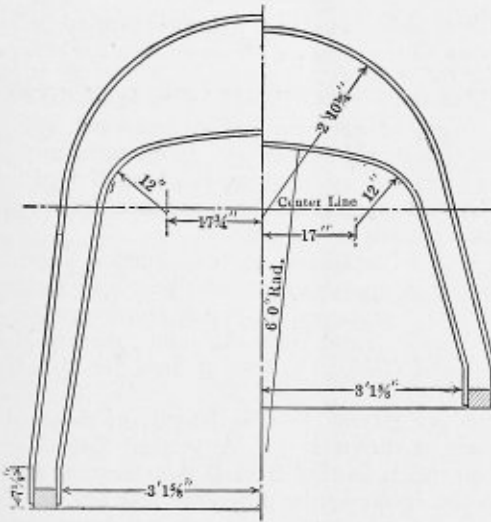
Cross Section of Firebox Wrapper Sheet
